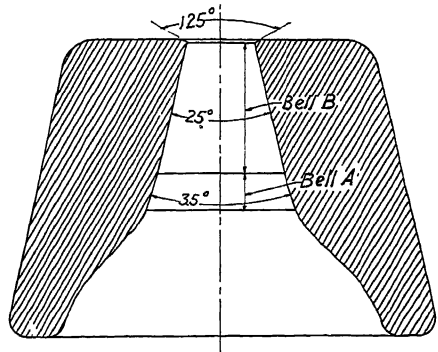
DIE WITHOUT BEARING, WHICH PRODUCED CUP AND CONE DEFECTS.
